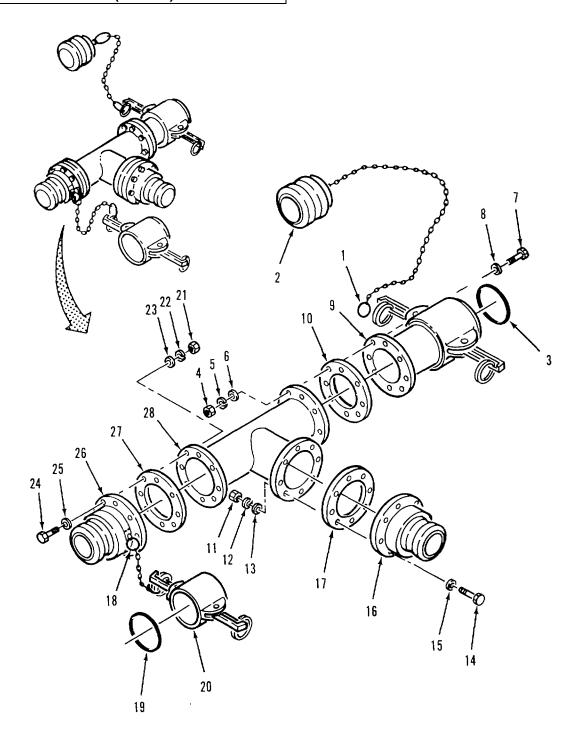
Tee Assembly (9117-Y1) Assembly.
